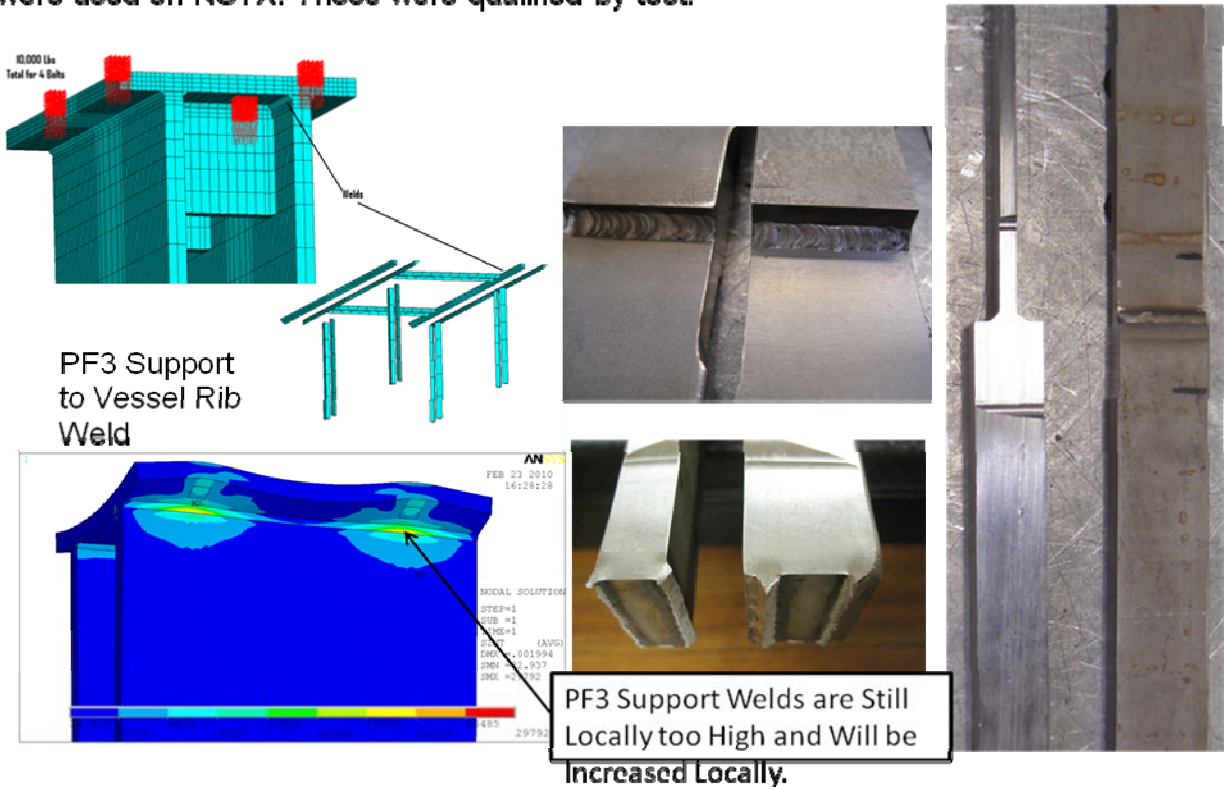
PF3 Welded Plate to Rib Weld Analysis - Showing Weld Test by Martin Denault
